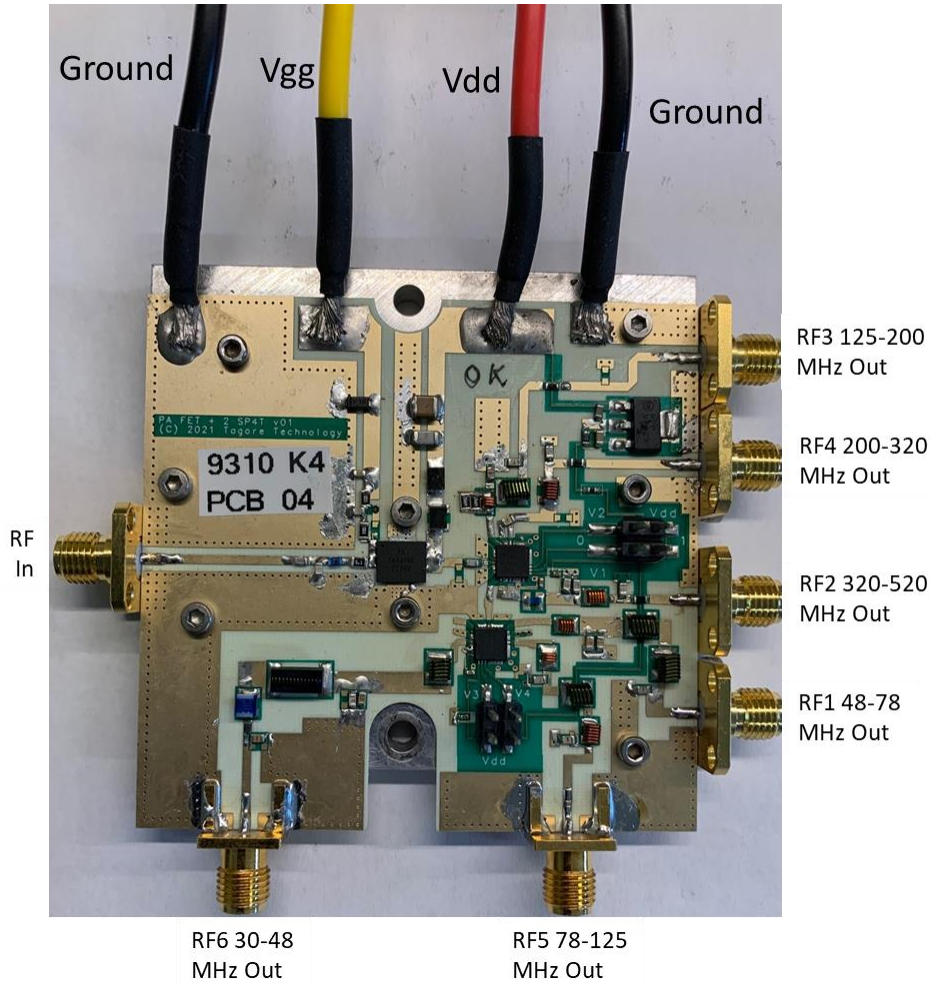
TA9310E + TS8441L EVB-I Assembled Board Picture
